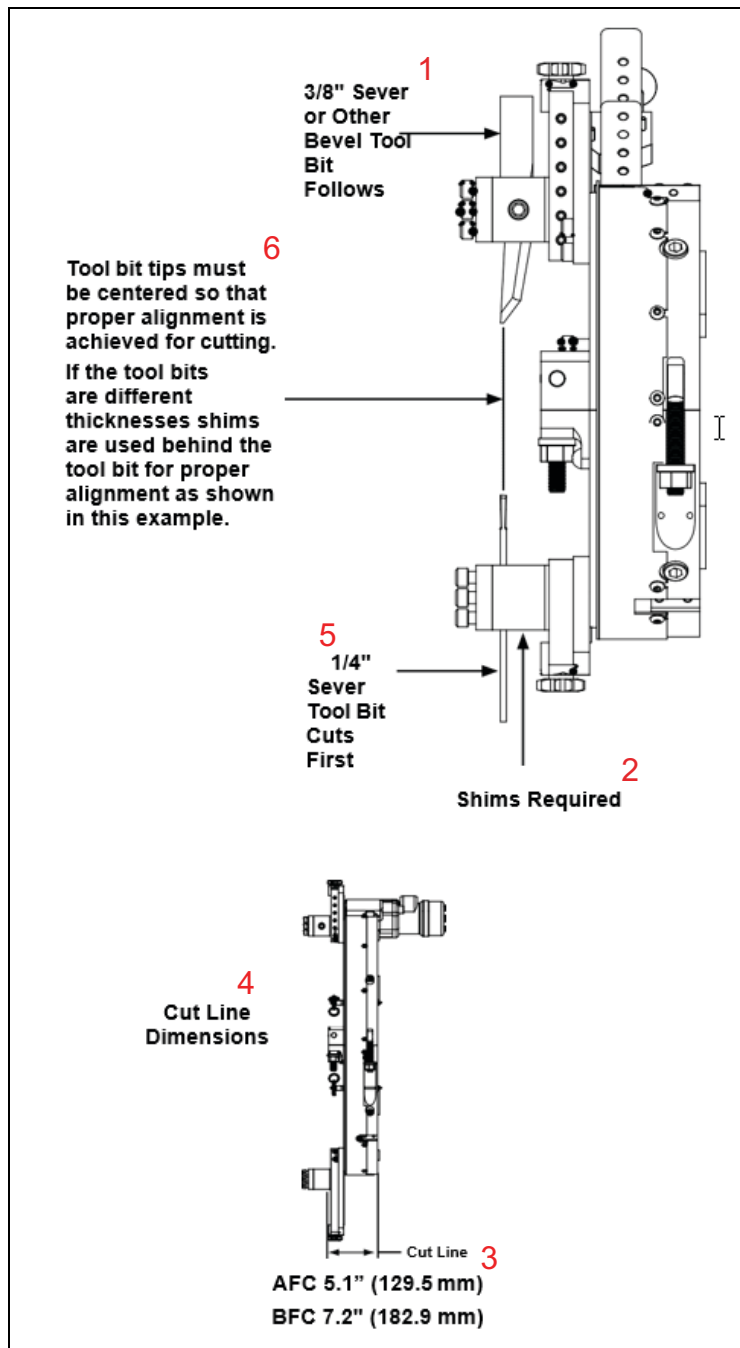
SEVER BITS AND CUT LINE DIMENSIONS
